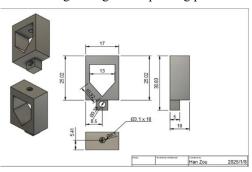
Penholder Design of Robotic Arm Components (all dimensions in mm)
